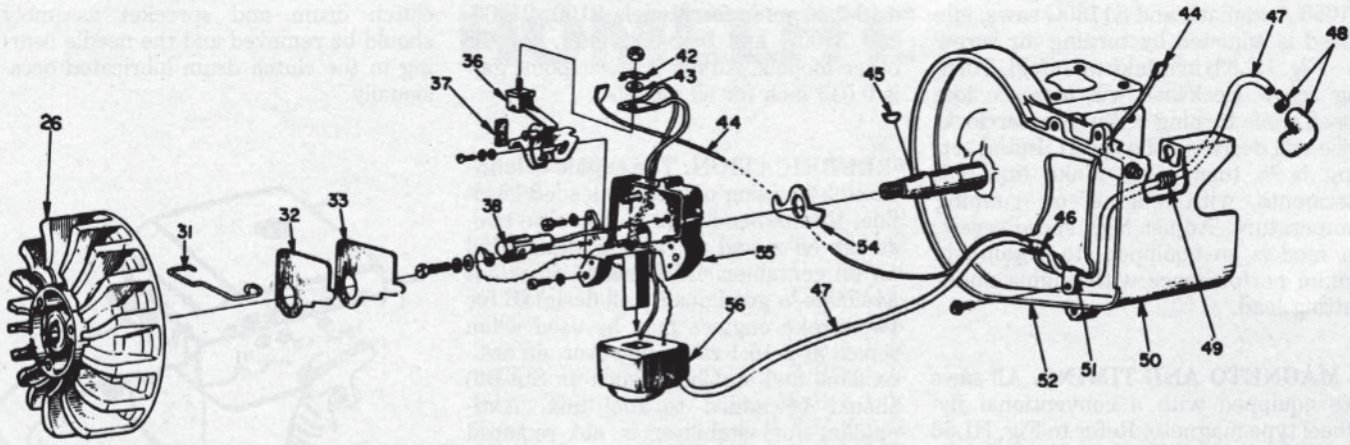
Exploded view of flywheel magneto assembly used on some models. Refer to Fig. HL57 for magneto which is also used on some models.
